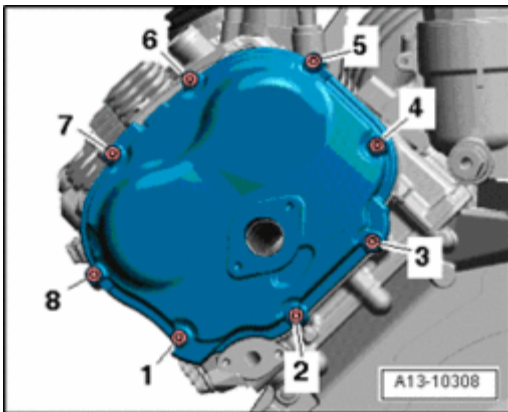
Identifying Left Timing Chain Cover And Tighten/Removing Bolts Sequence
